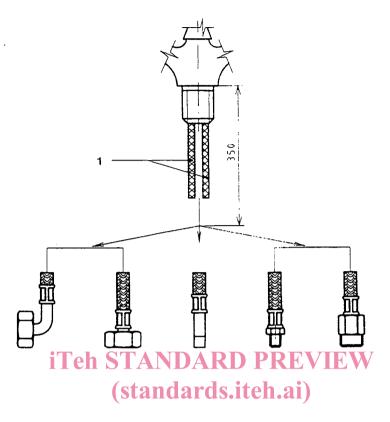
Single hole thermostatic mixing valve with integral spray attachment
